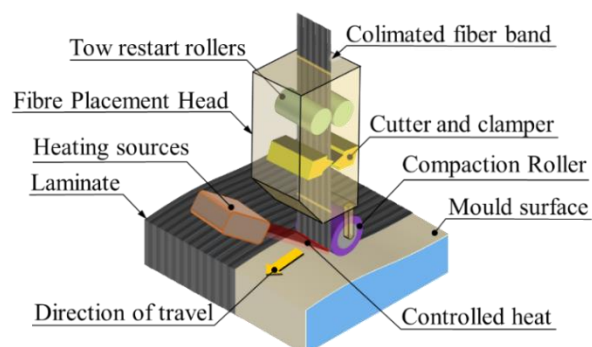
Thermoplastic tape placement, components of a placement head, [1, 11, 12]
